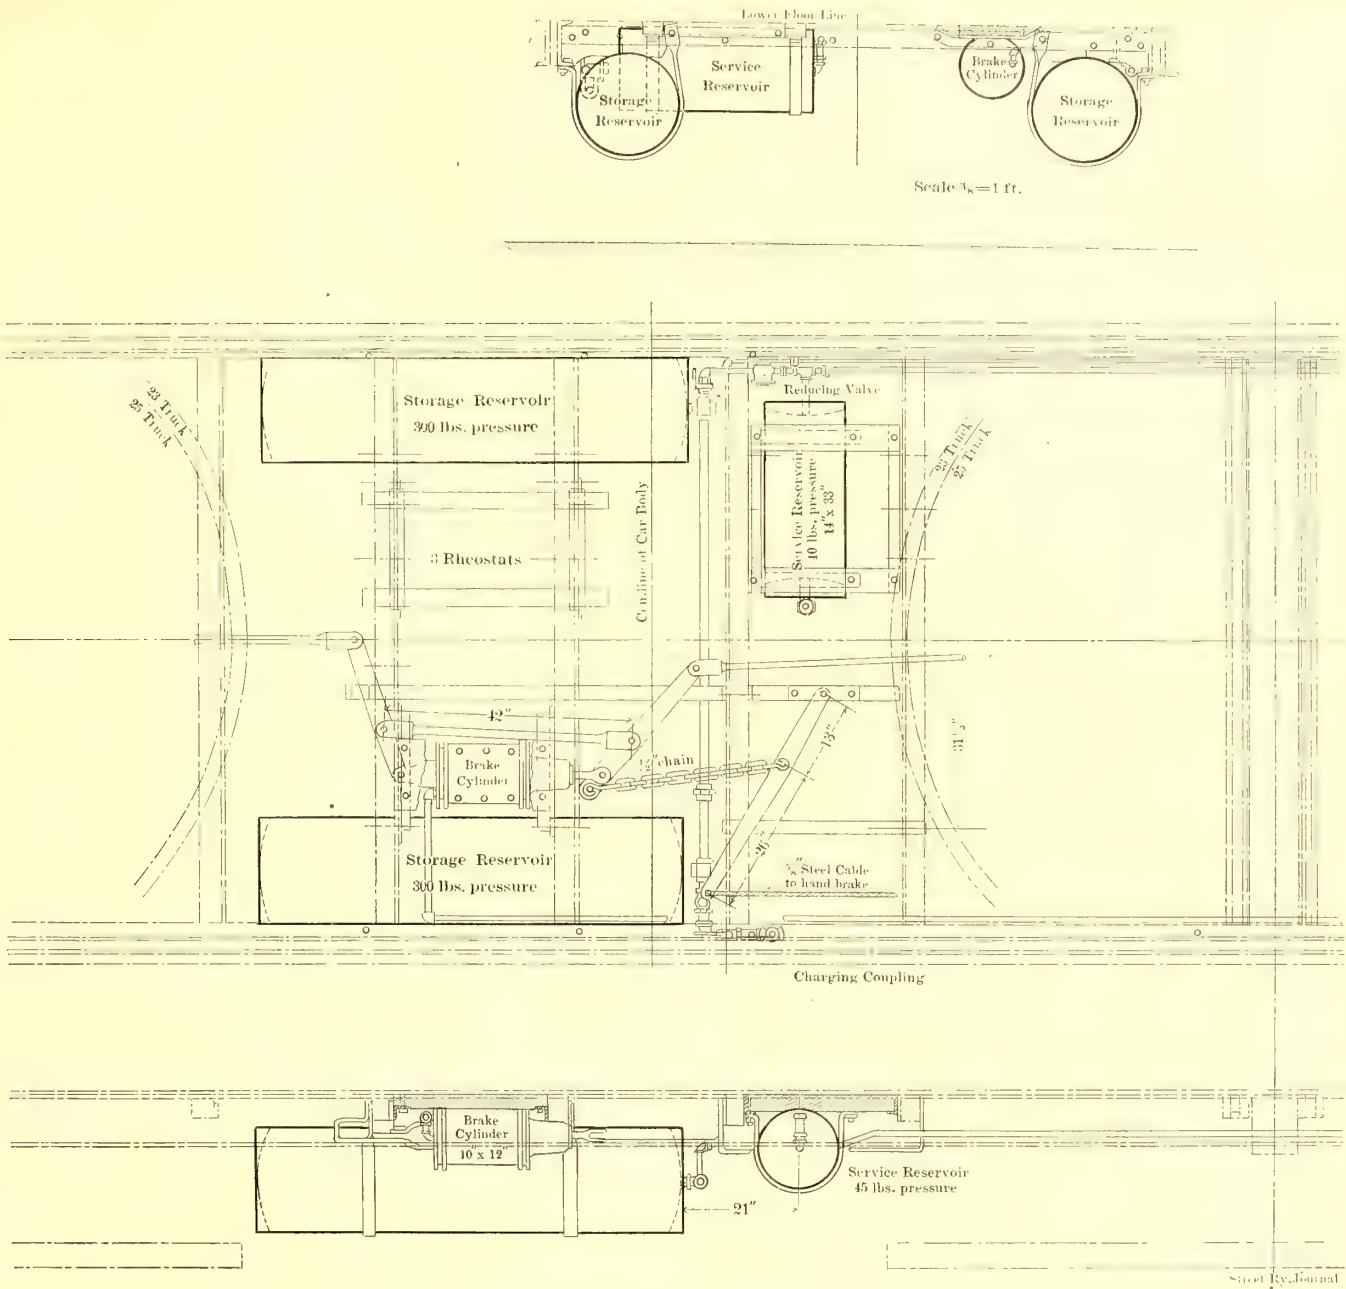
STORAGE AIR BRAKE EQUIPMENT ON CAR
